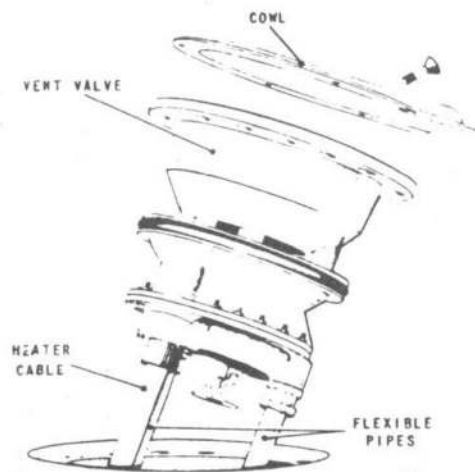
INTEGRAL TANK INWARD VENT VALVE - REMOVAL AND ASSEMBLY
